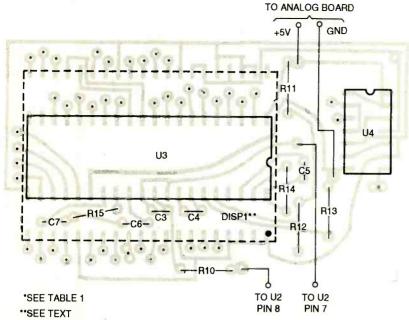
After assembling the display board, install all of the jumper connections listed in Table 1 on the component sided of the board. The LCD module is then mounted to the copper side of the board.
